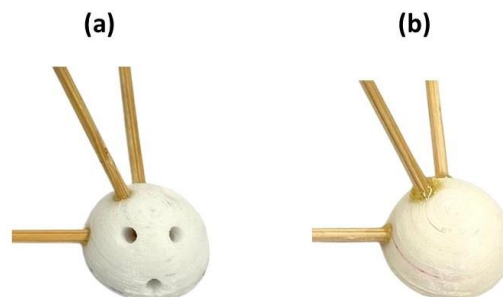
Joints connected to sticks (a) open structure and (b) closed structure joints
